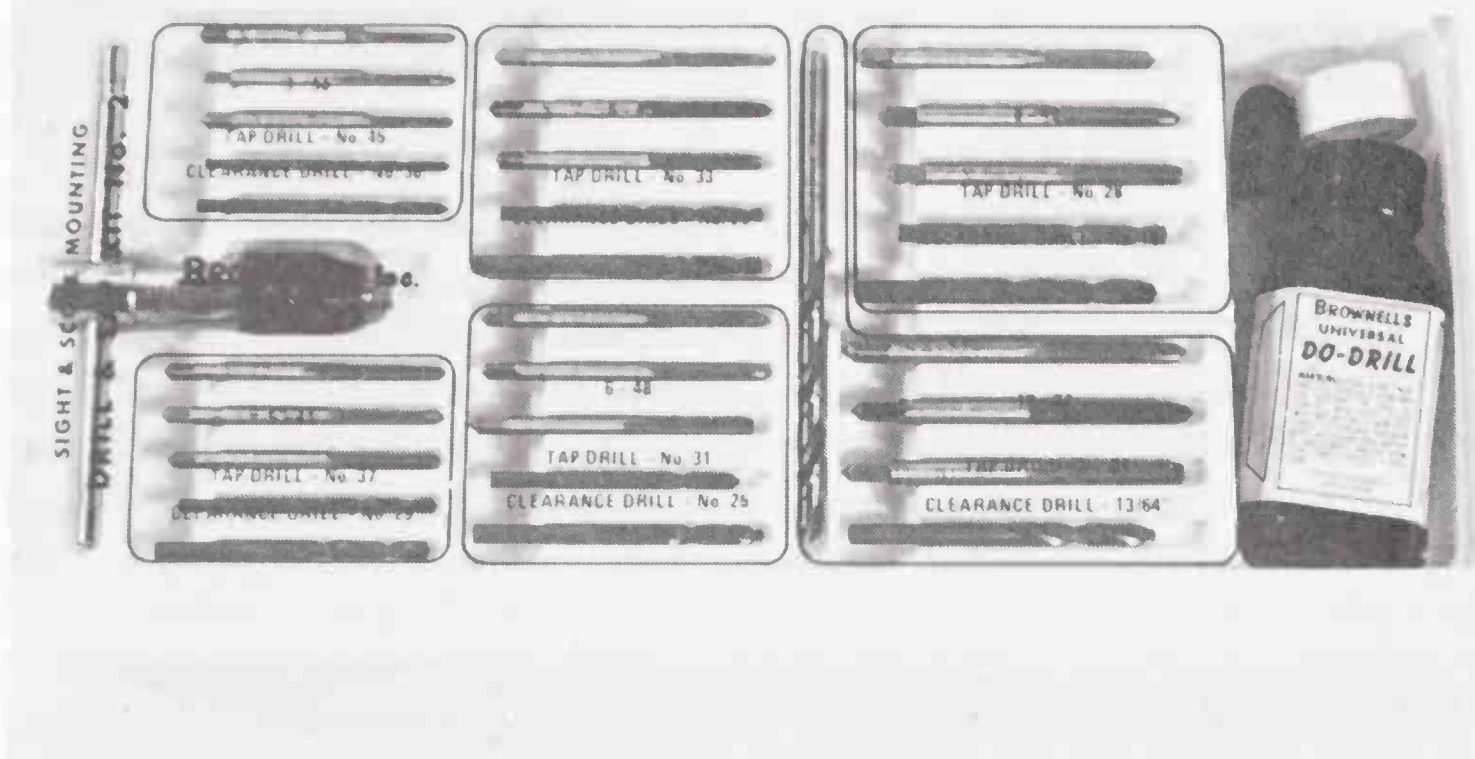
Brownell's Sight and Scope Mounting Drill and Tap Kit No. 2 will handle the majority of sight-mounting needs.
